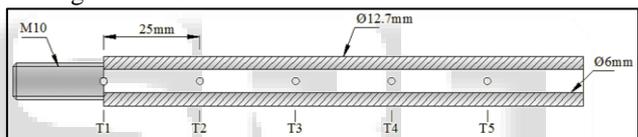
Hollow Pin Fin with Inner Diameter = 6mm
